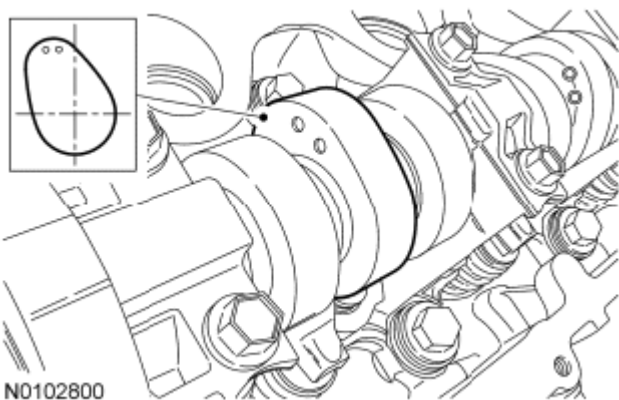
Identifying No. 5 Cylinder Camshaft Exhaust Lobe
